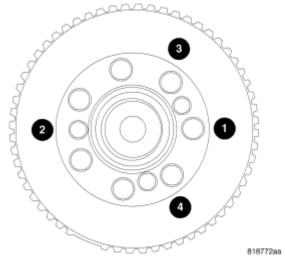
TARGET WHEEL Courtesy of CHRYSLER LLC
